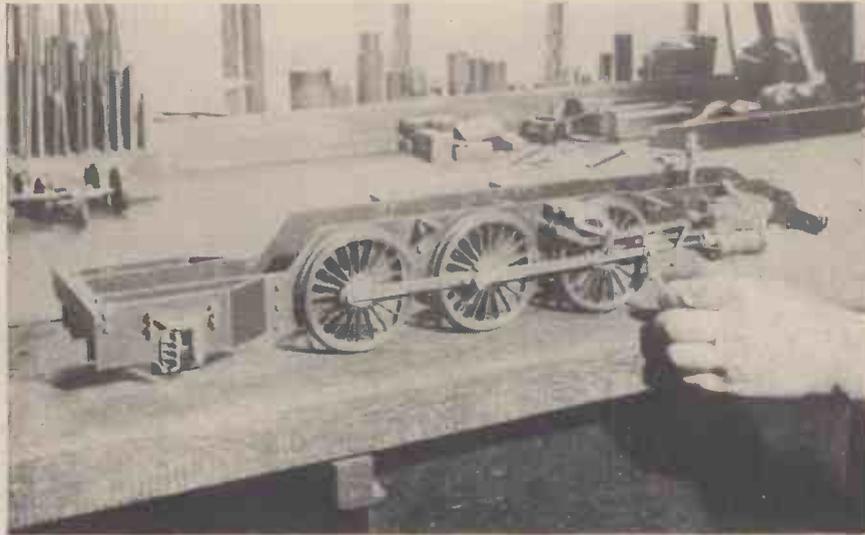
Engine main frames, with driving wheels, cylinder and valve gear assembled on one side
